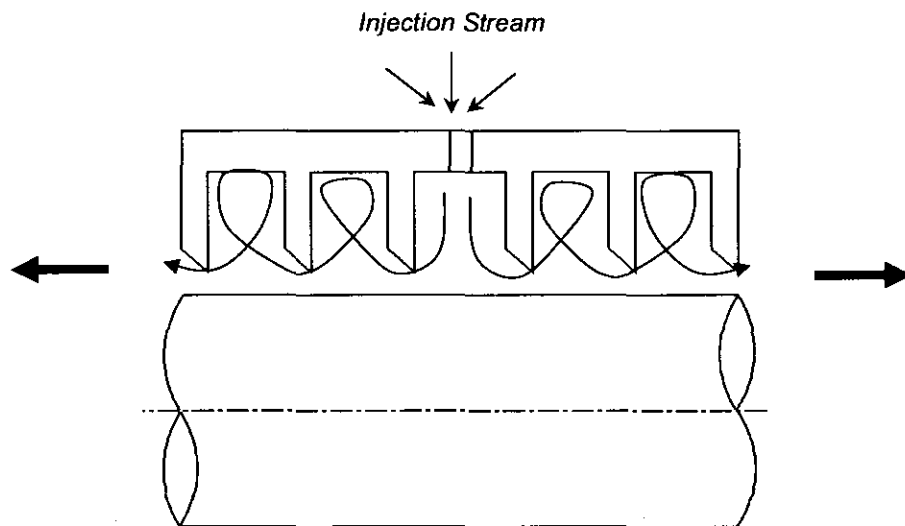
Grooved shaft and grooved stator with no leakage and rotating shaft
